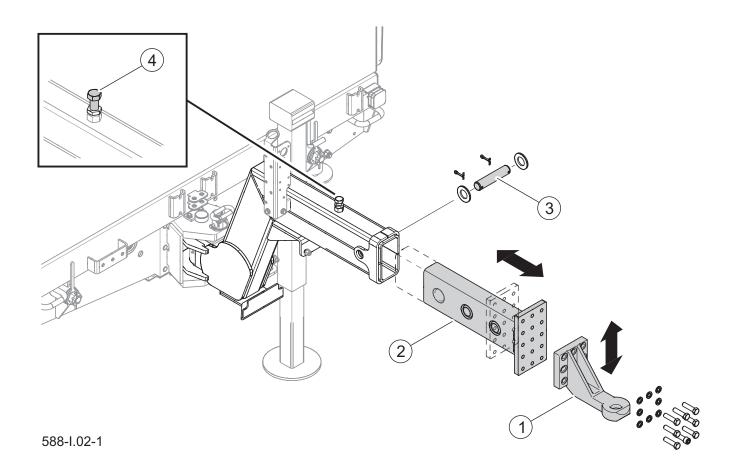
Adapt the machine to the upper hitch of the carrier vehicle
